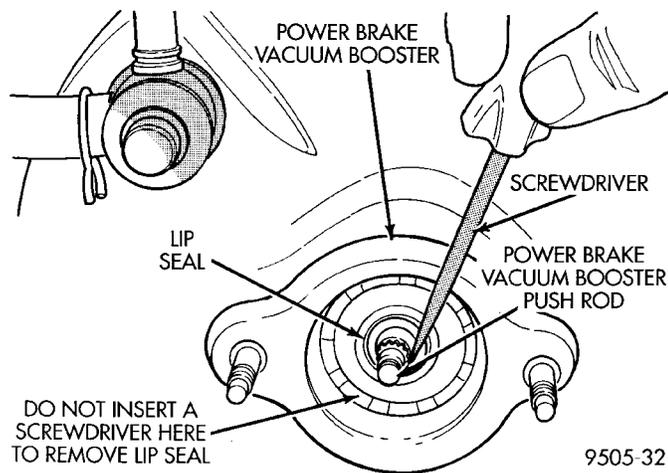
Vacuum Seal Removal From Power Brake Booster
